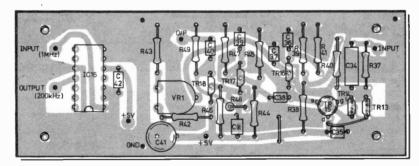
Layout of the buffer and calibration circuits on the printed circuit board
